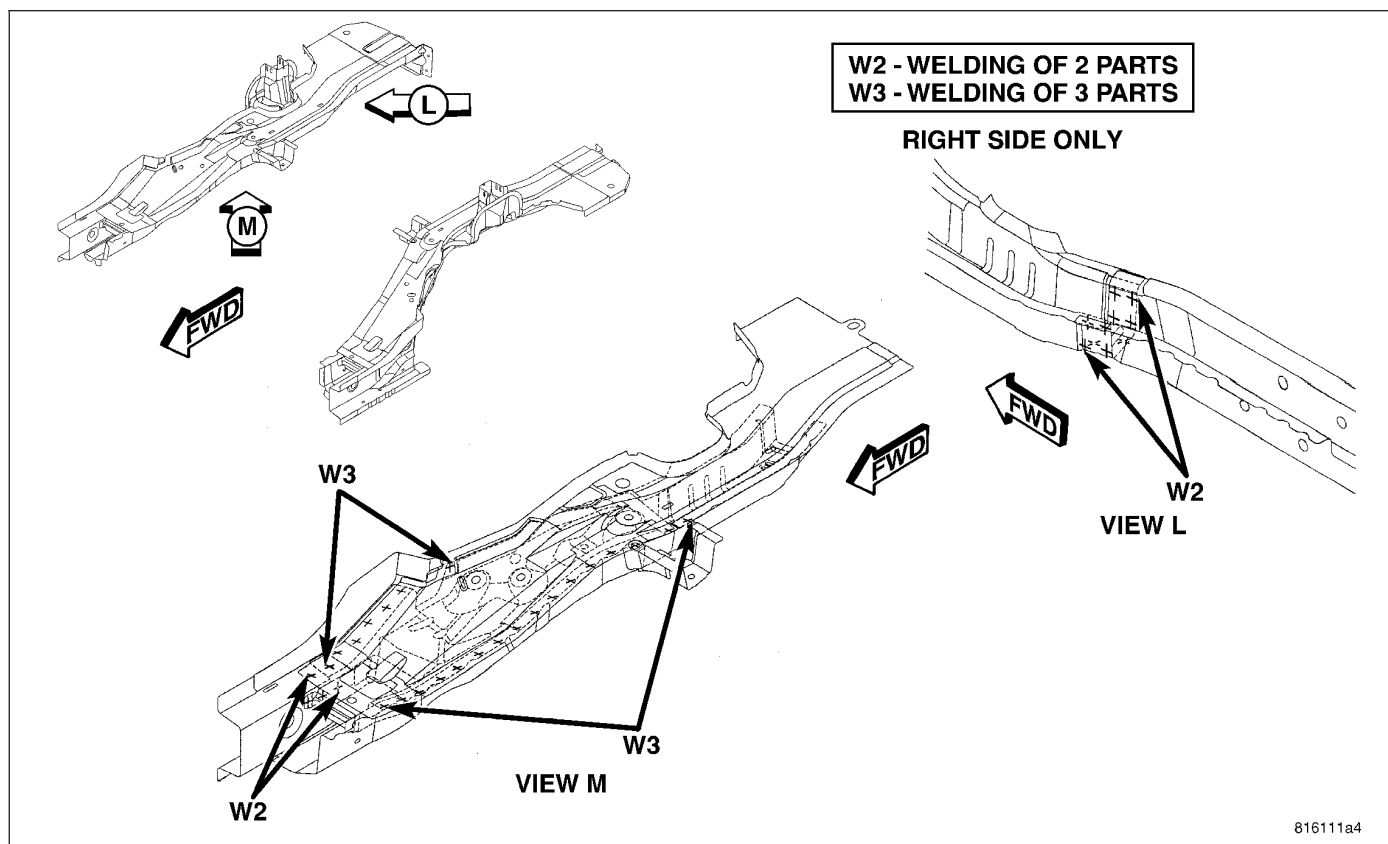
SIDEMEMBER ASSEMBLY (7 OF 17)
